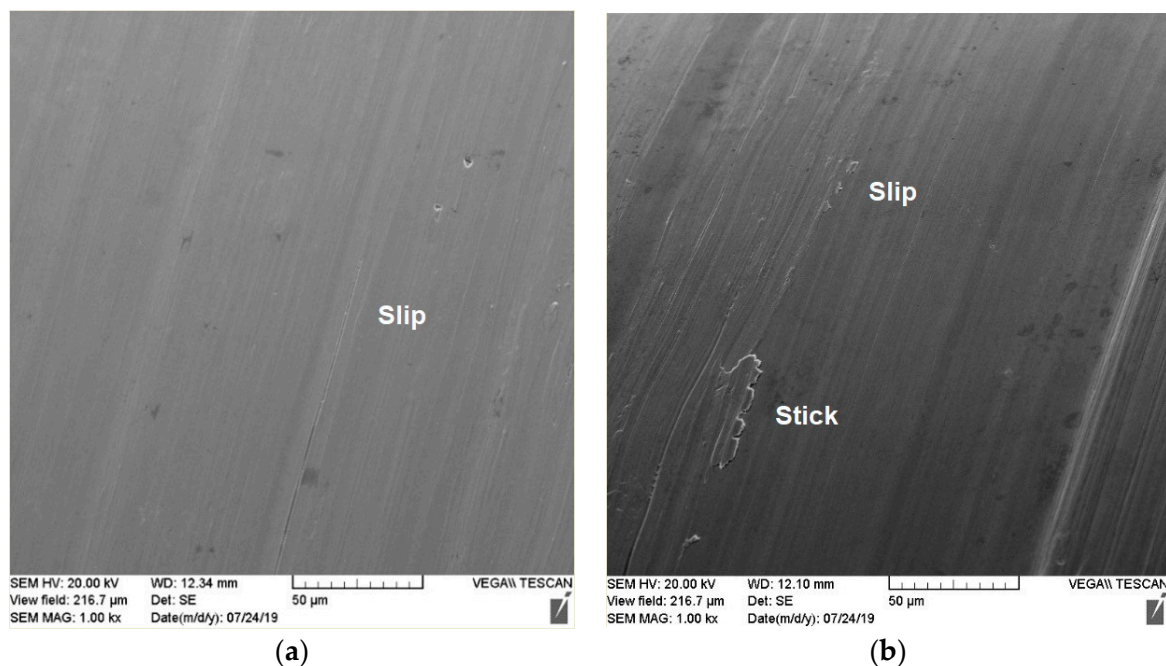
Chips undersurface produced by cutting tool with: (a) CAD and (b) HiPIMS coating.
